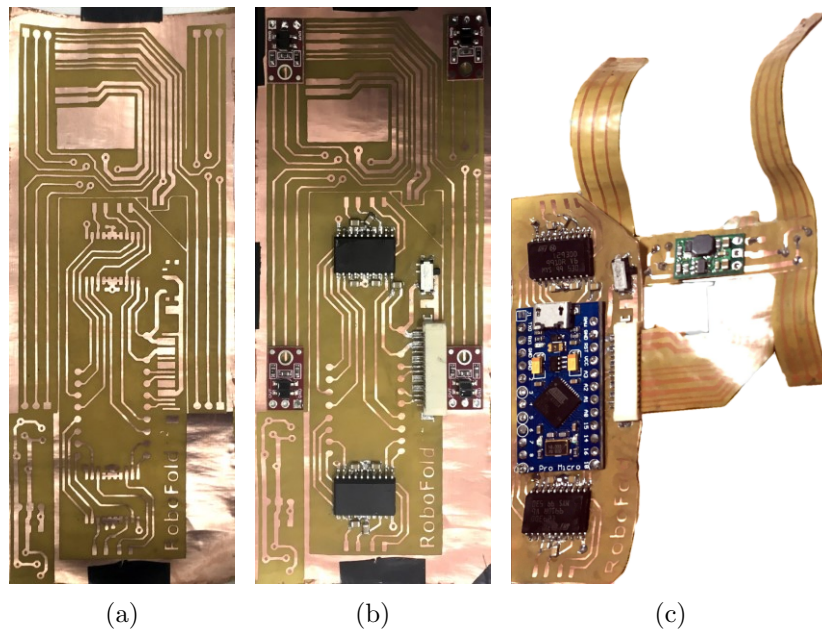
(a) PCB without any components soldered. (b) PCB without Arduino Microcontroller soldered. (c) PCBs final state after all components soldered, cut and folded ready to be inserted inside the robot.
